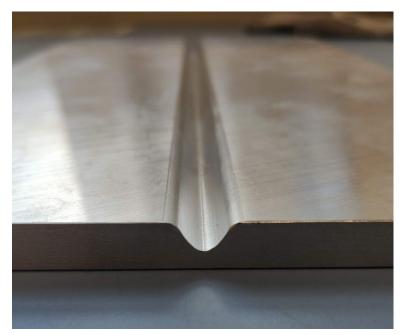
Mould for manufacturing pre-structures with the excess length feature. The width of the feature is 13.91 mm, with an embossment height of 5.95 mm. The mould surface is the outer surface of the corner in final shape.
